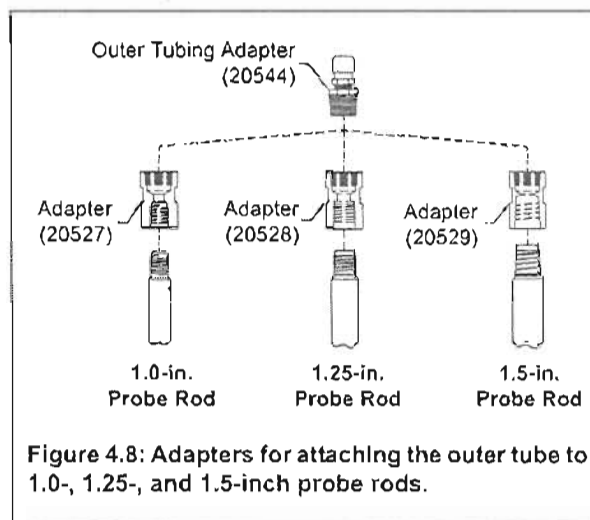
Adapters for attaching the outer tube to 1.0-, 1.25-, and 1.5-inch probe rods.
